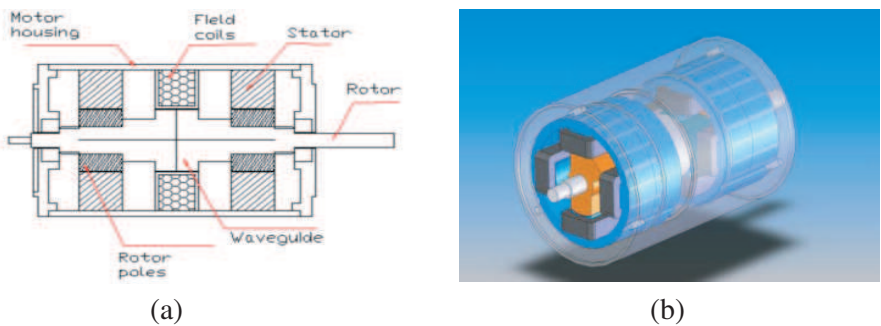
(a) A cut view of the motor/generator. (b) The complete motor/generator assembly.
